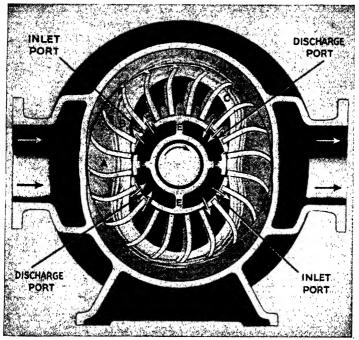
Shrouded vanes rotate around inlet and discharge chambers. (Courtesy of Nash Engineering Co.)
